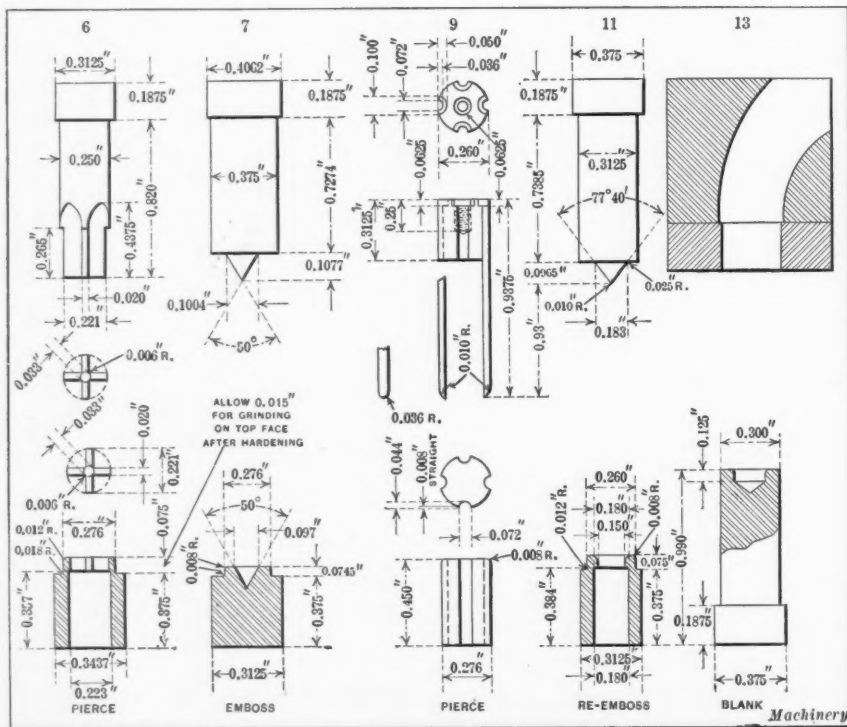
Piercing, Embossing and Blanking Tools for Socket
